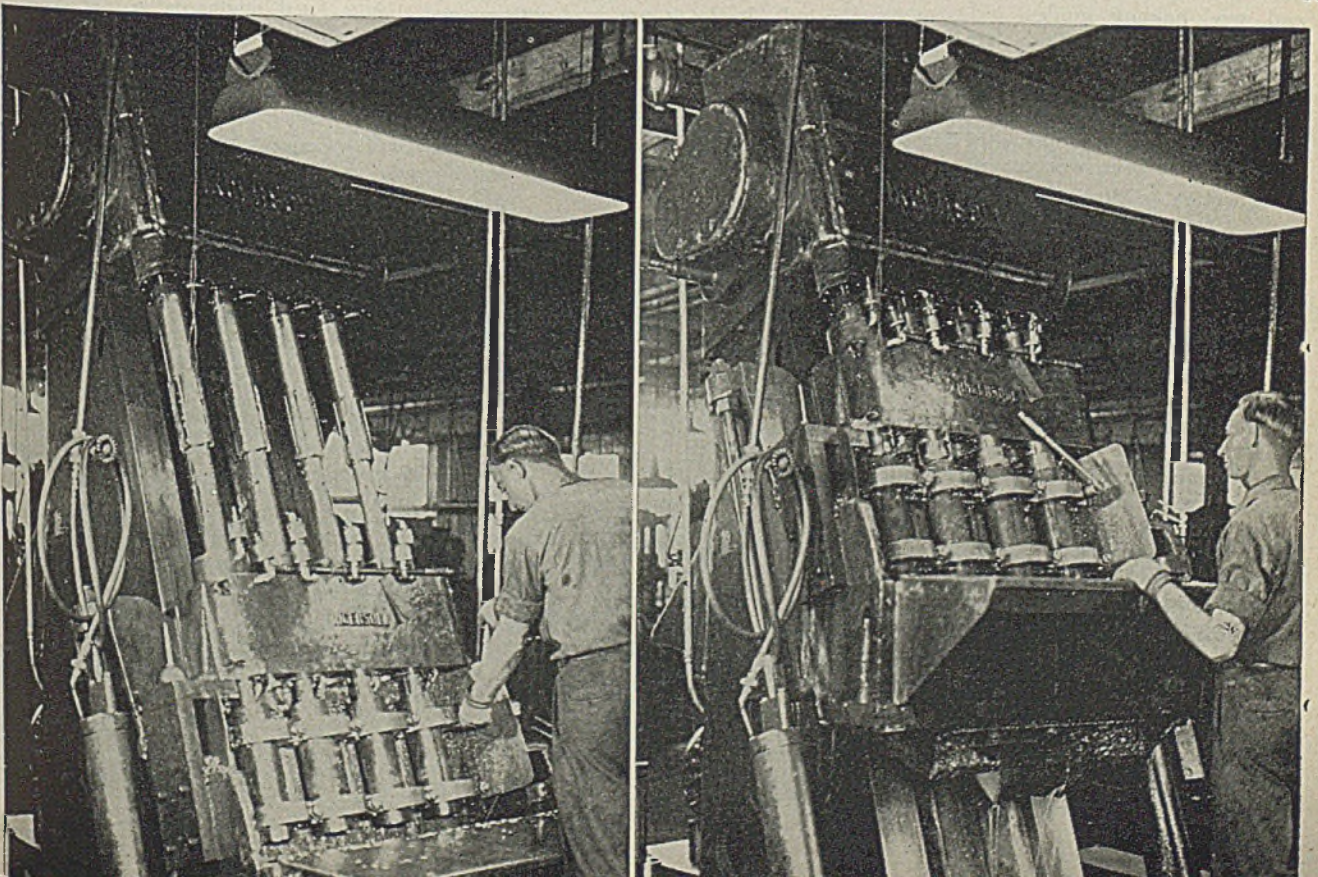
Inspecting bore diameters and counterbore depth, operation 9, Table I
